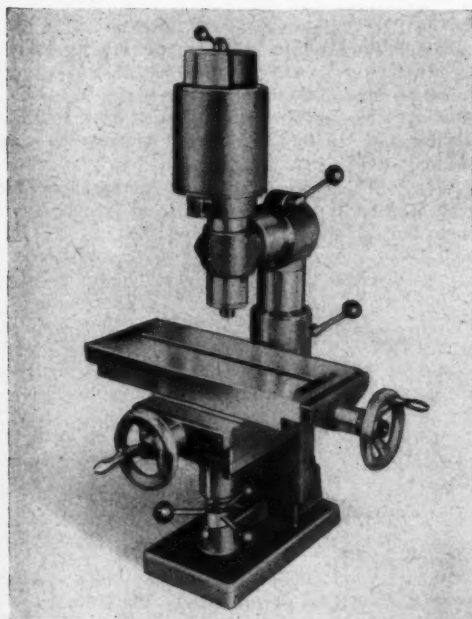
The Arboga UM 400 universal machine is here shown set up for vertical milling
